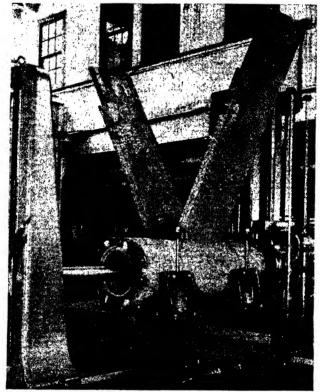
Boring a propeller strut on a Giddings and Lewis machine.
